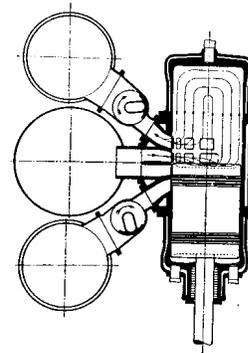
Rotary Valve in Exhaust Hamilton-M.A.N. double acting engine. (By permission of Lima-Hamilton Corp.)
